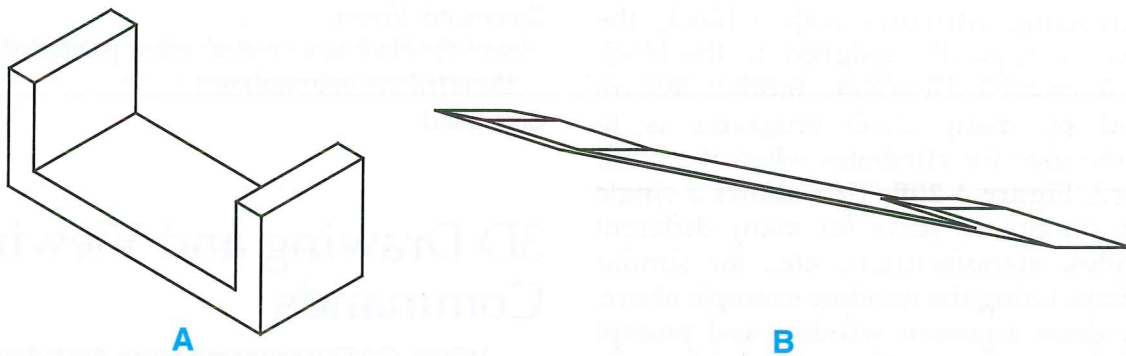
A—An isometric drawing of a mechanical part. This is a 2D isometric drawing that appears to show the object in three dimensions. B—When the isometric drawing is viewed from a different viewpoint, you can see that it is two-dimensional.
